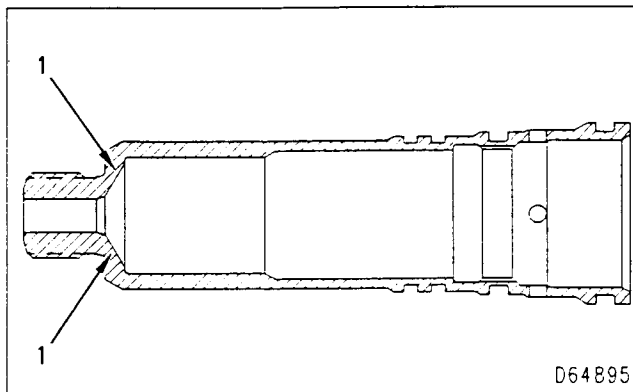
Typical Unit Fuel Injection Pump Sleeve. (1) 120 degree included angle surface where the lower injector O-ring seals.
